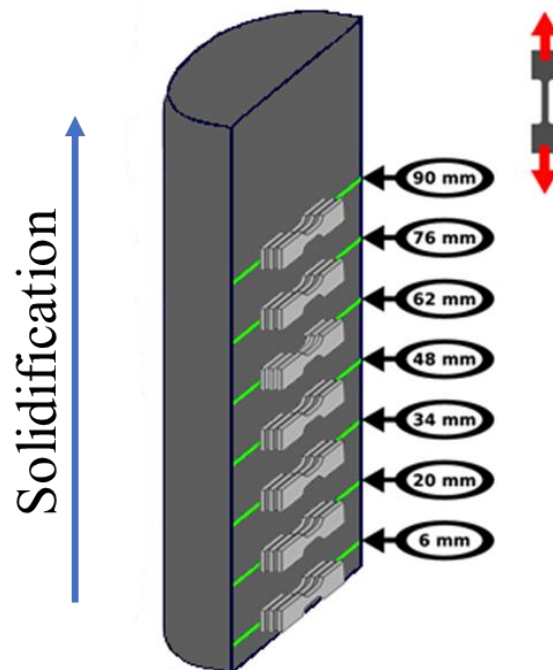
Schematic diagram of specimen extraction for tensile testing, highlighting the central position of the specimens.
